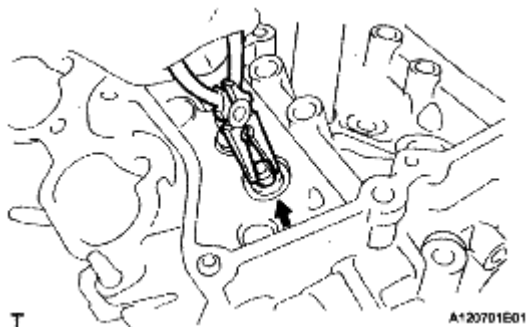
Removing Valve Stem Oil Seals Using Needle-Nose Pliers
